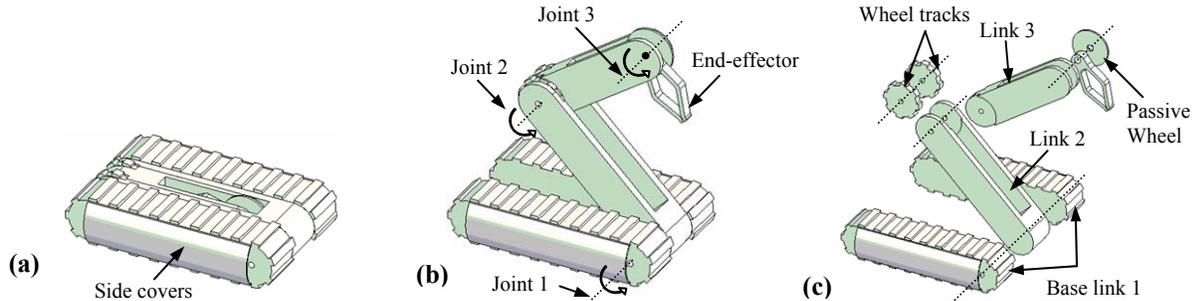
(a) closed configuration; (b) open configuration; (c) exploded view.
